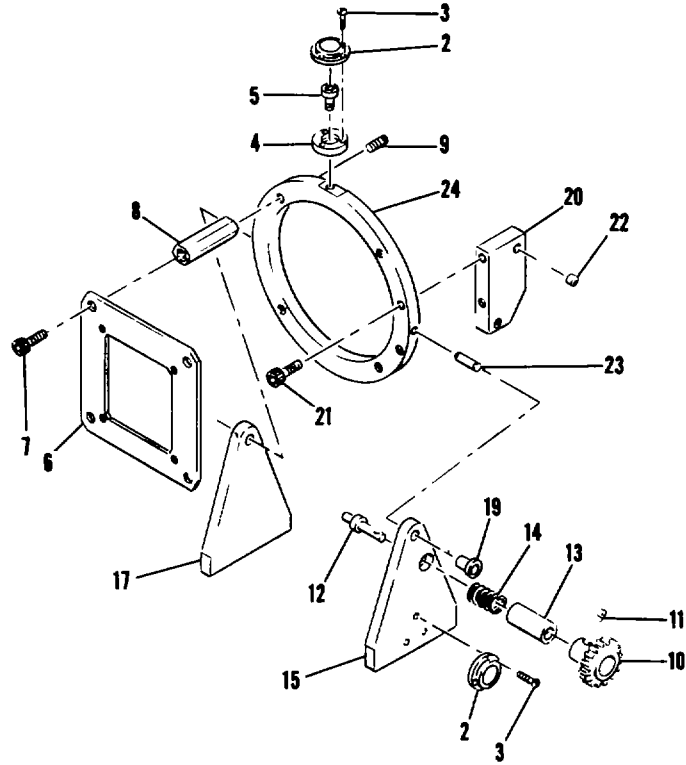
Gyro Tester, Indicator Assembly (Sheet 1 of 3)
